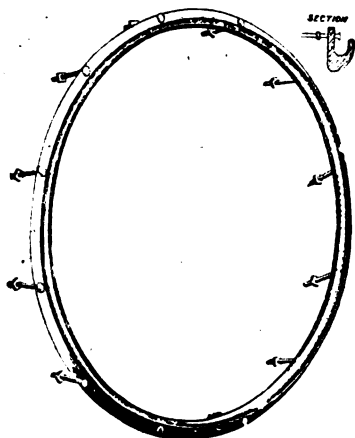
The new Flange which, when fitted permanently to motor-car wheels, enables the Stepney Spare Wheel to be quickly and easily attached.
